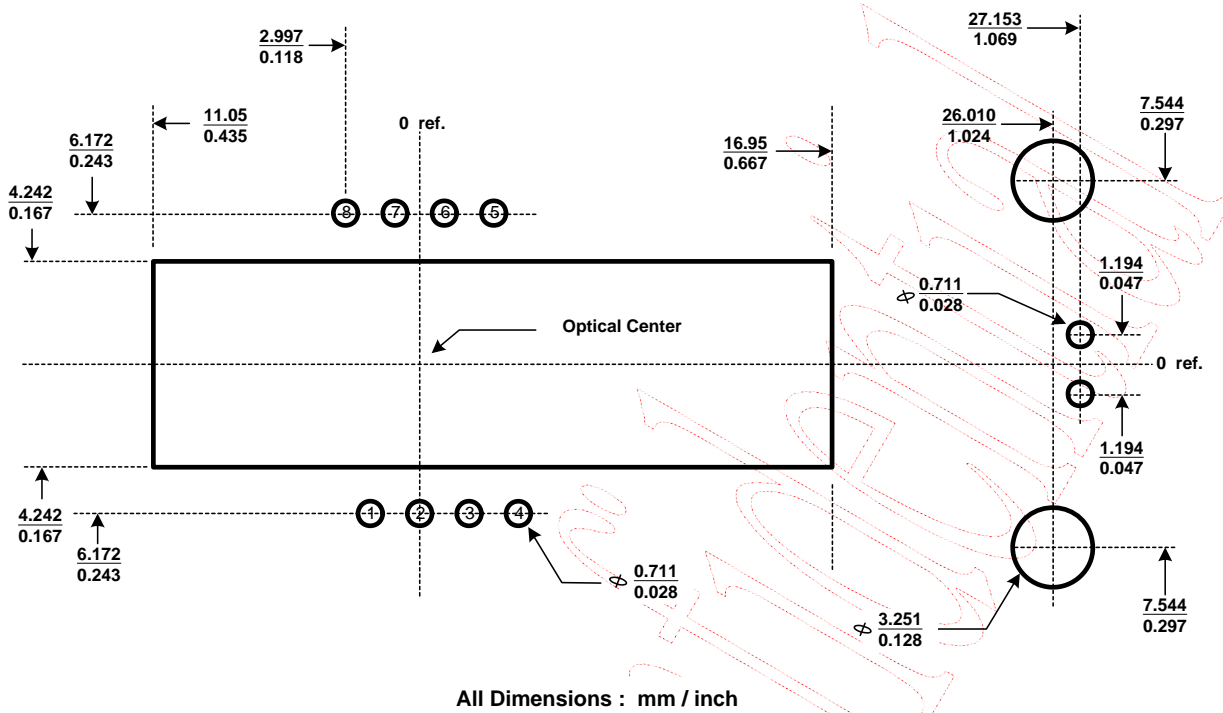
Recommended PCB Mechanical Cutouts and Spacing
